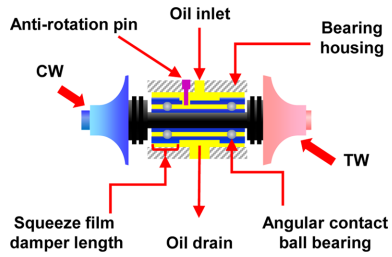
Schematic view of TC ball bearing system. CW: Compressor wheel. TW: Turbine wheel.
